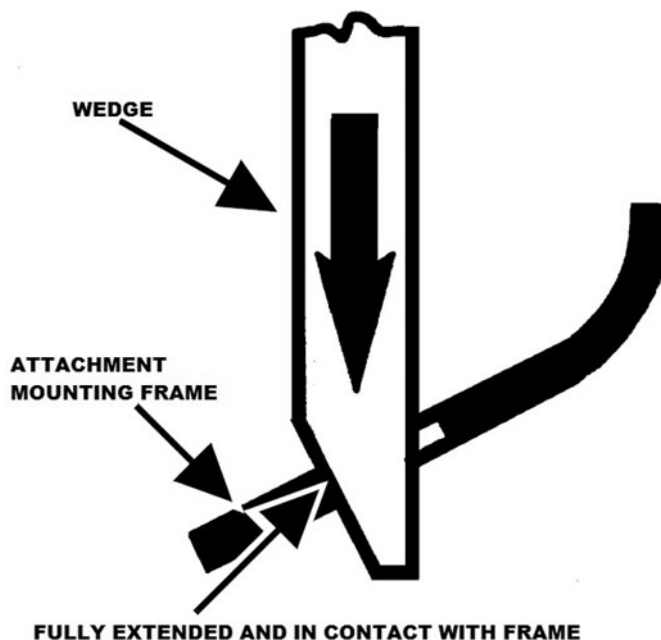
Correct wedge engagement with the attachment-mounting frame.
